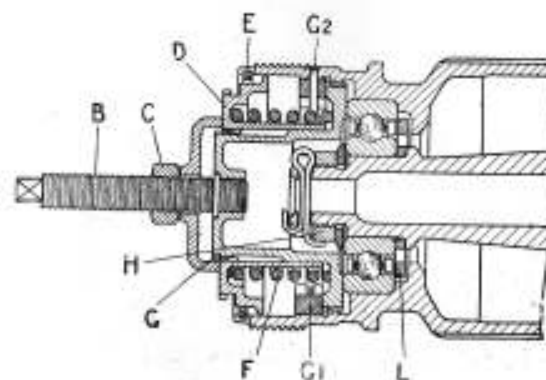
TOOL IN POSITION FOR REMOVING LOCKING RING.
